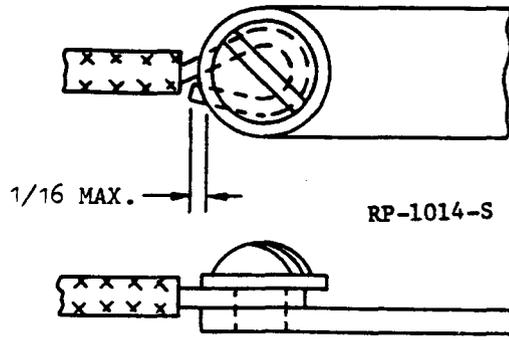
SOLDERLESS CONNECTIONS AT SCREW TYPE TERMINALS
